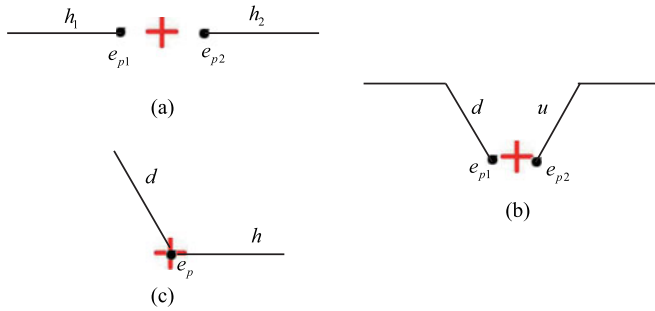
Definition of welding seam position. (a) Butt joint for the I groove. (b) Butt joint for the V groove. (c) Angle welding.
